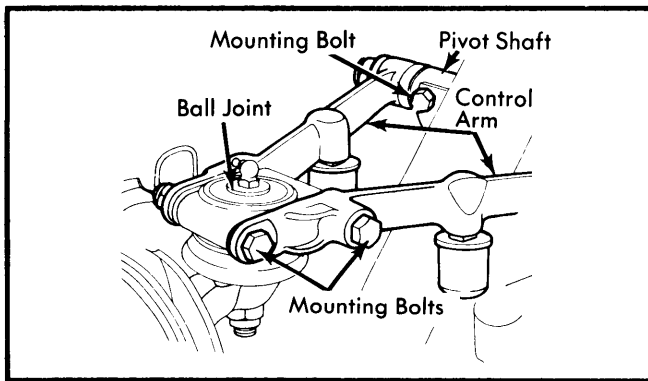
Showing Upper Control Arm Mounting Points on XJ6 and XJ12
